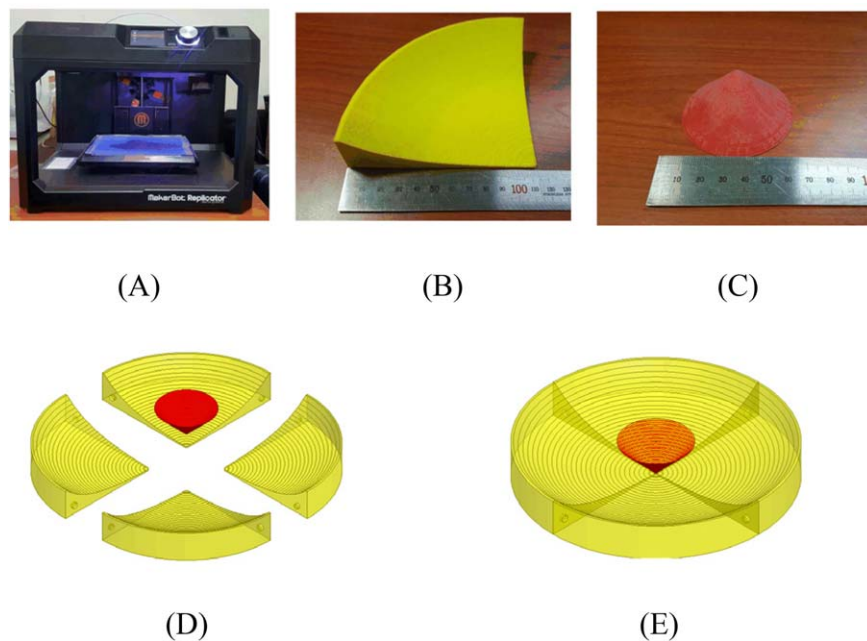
Photograph of the printed parts of the antenna: (A) 3D printer, (B) the tapered cavity, (C) the printed mono-cone, (D) dismantled parts, and (E) assembled parts. [Color figure can be viewed at wileyonlinelibrary.com]
